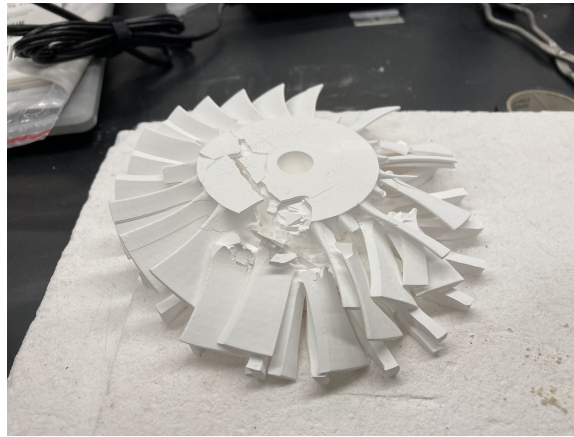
Initial turbine rotor test print on the ADMATEC printer after binder burnout.
